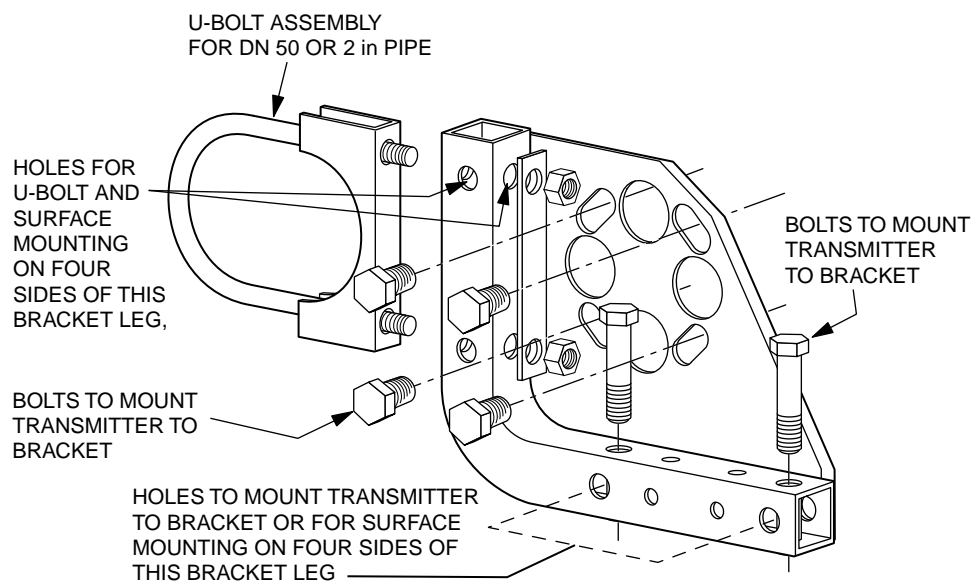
Mounting a Traditional Structure DP Transmitter with a Universal Bracket
